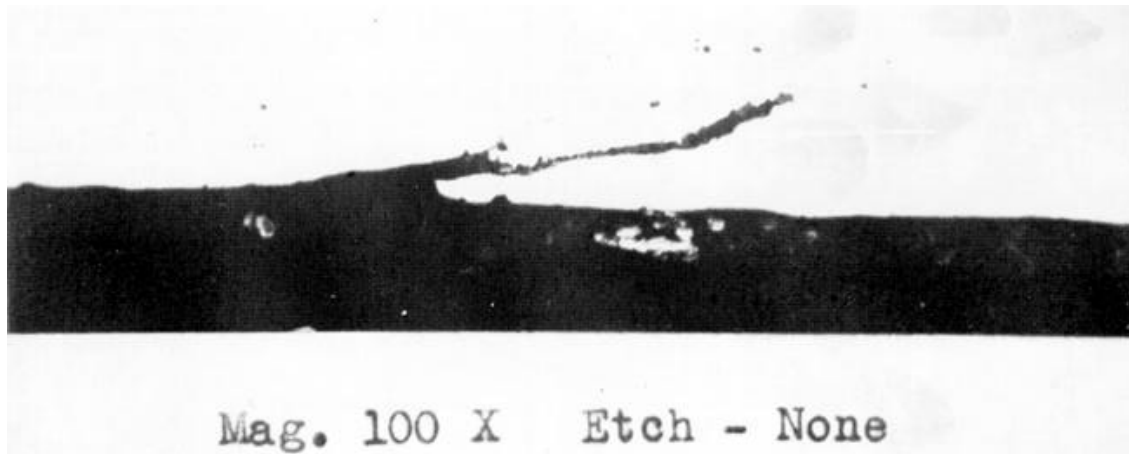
Cross-Section of a Forging Lap (Magnified 100X).
